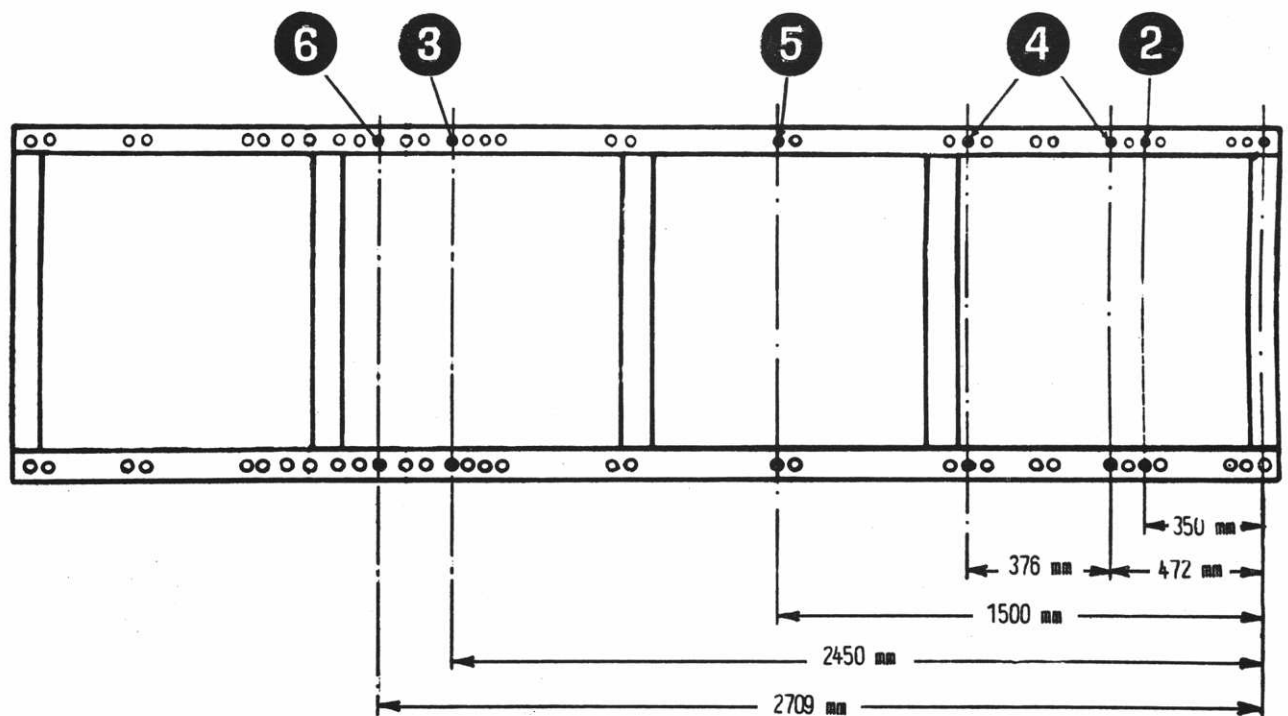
PLAN OF DETAIL ① WITH POSITION OF HOLES EMPLOYED
